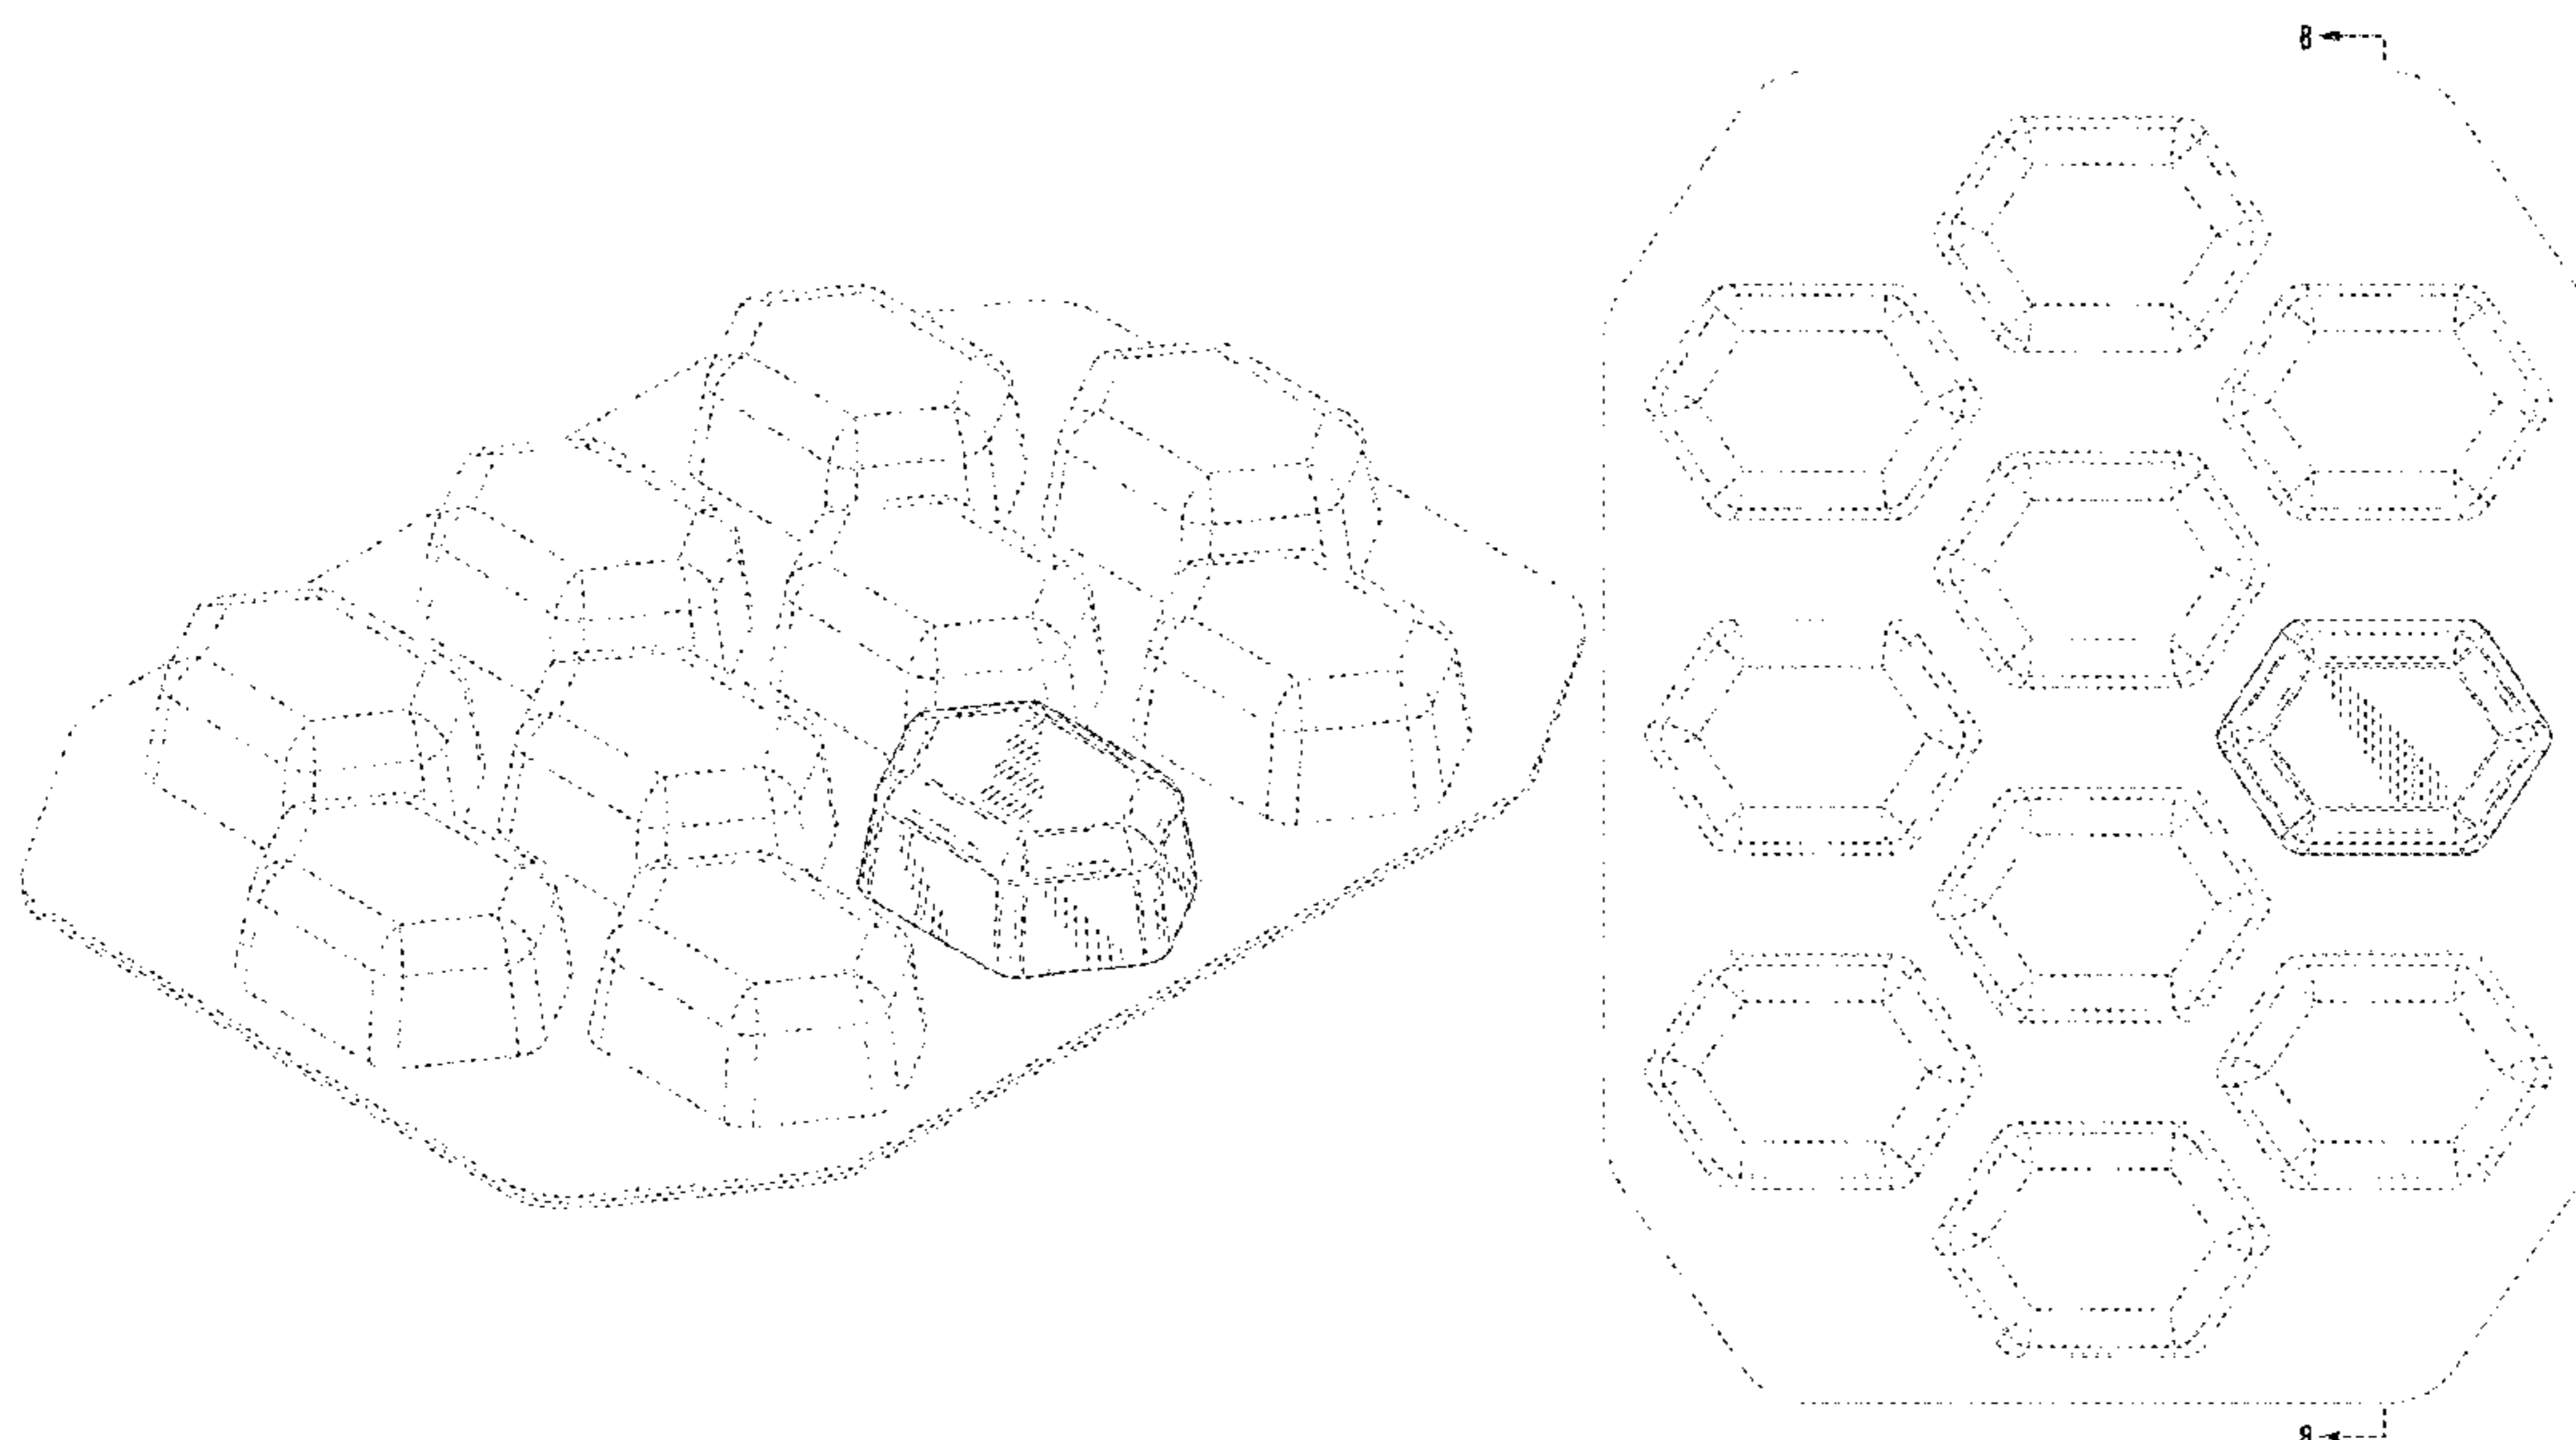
is a top view of the embodiment shown in FIG. 9;
